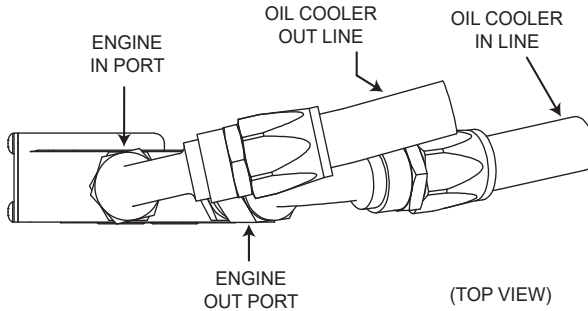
Oil Cooler Adapter Line Fitting Orientation
